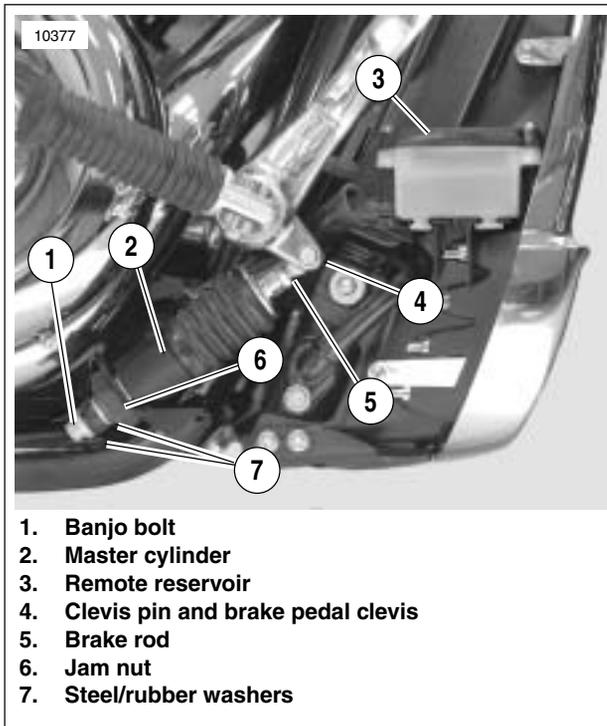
Rear Brake Master Cylinder & Reservoir
